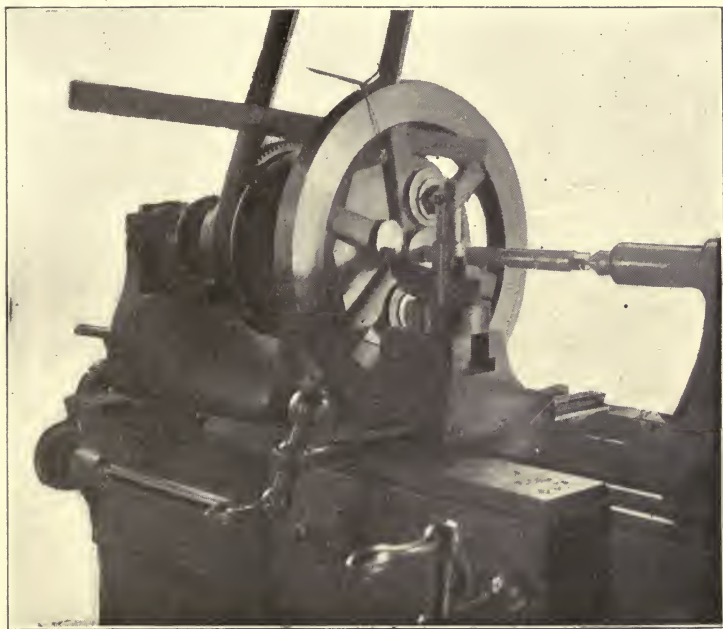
FLY-WHEEL, BOLTED TO FACE PLATE.
